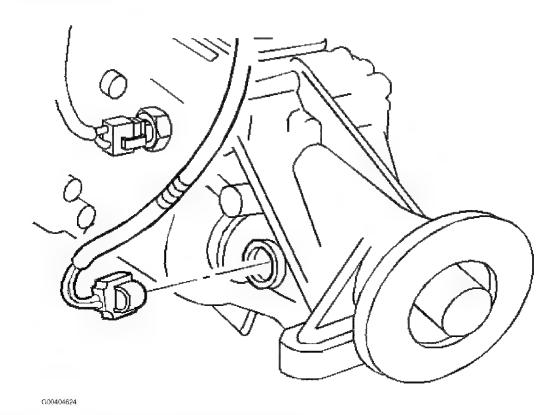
Locating Vehicle Speed Sensor Connector Courtesy of GENERAL MOTORS CORP.
